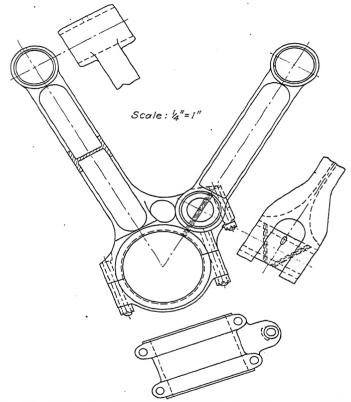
Master and articulated connecting rod used in the Packard 2500 airplane engine.
